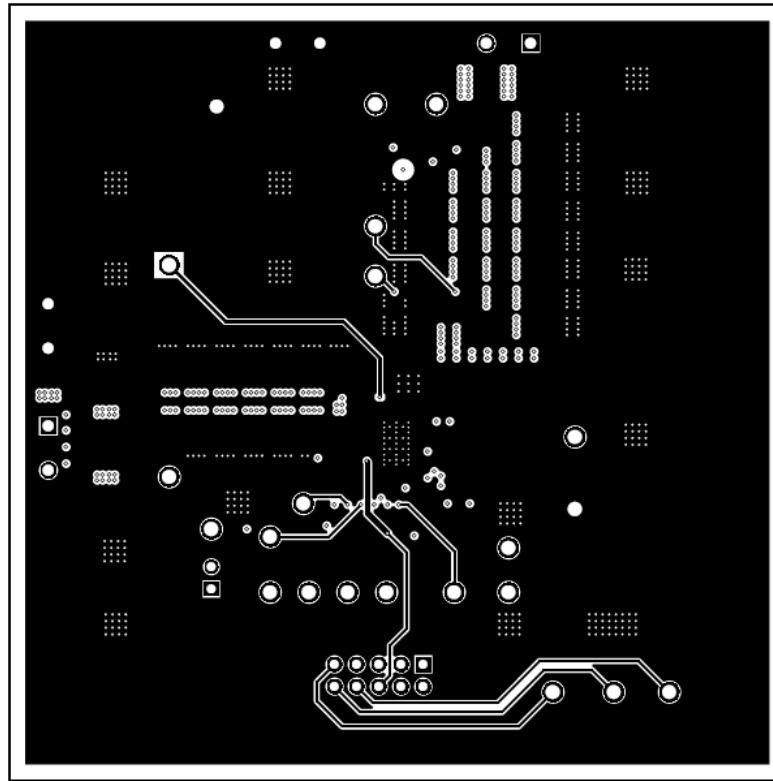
PWR-784EVM Inner Layer 3 (Top View)
